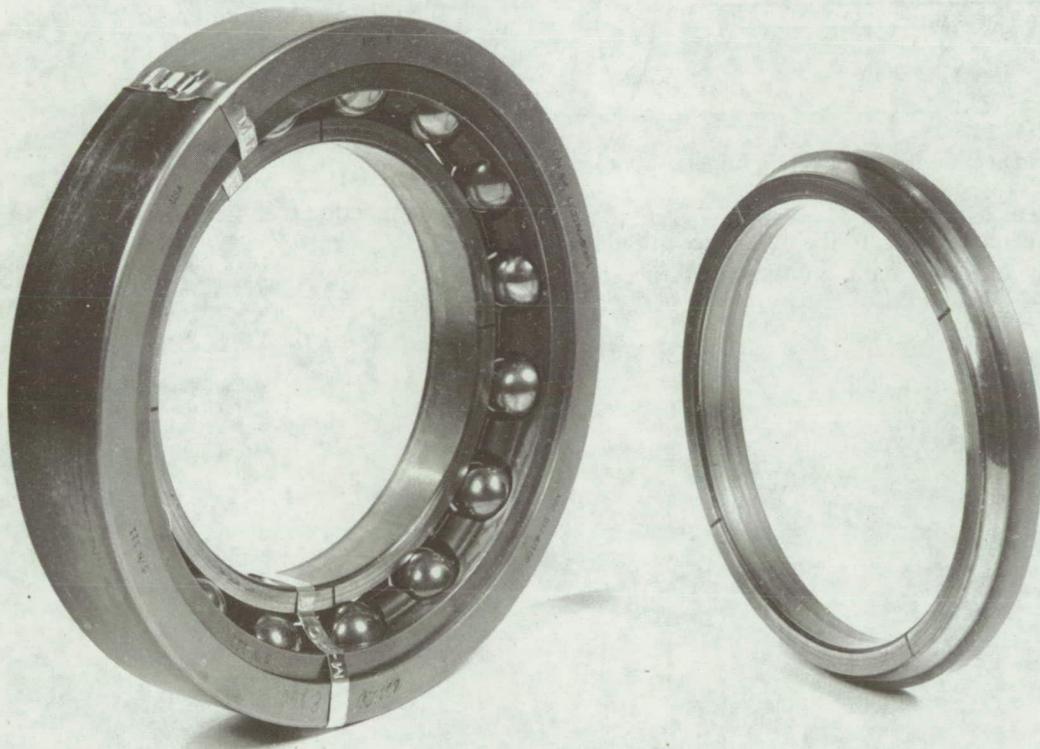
Split Inner-Ring Angular Contact Ball Bearing (Partially Disassembled)
